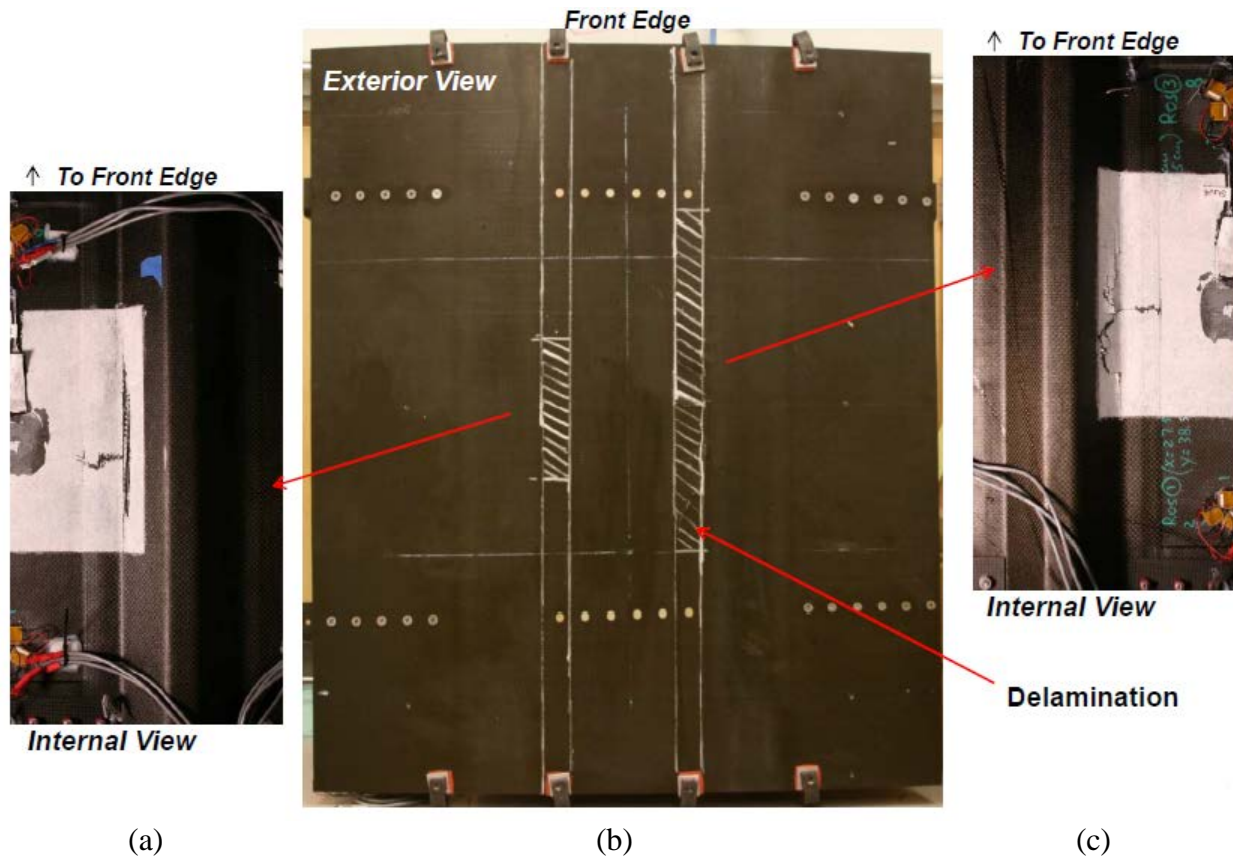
(a & c) crack formations along the stringer radii and on the flanges viewed from the interior side, and (b) post-test A-scan map of Stringer05 (hatched areas are locations of skin-to-stringer delamination);
